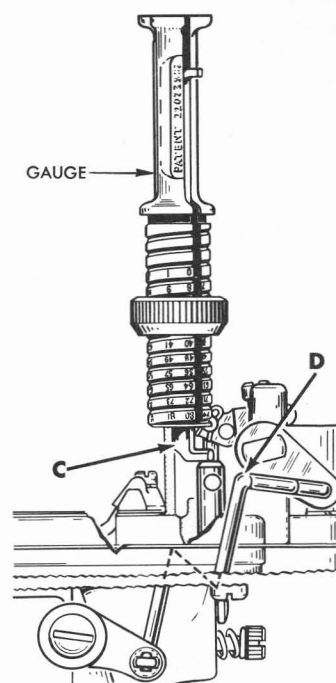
Use of Pump Stroke Gauge T109-117S
